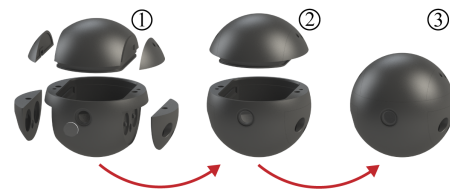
Assembly process of the six resin-3D printed parts that form the spherical shell of the robot. The two bodies in step (2) interface with an O-ring to form the resealable watertight enclosure.
